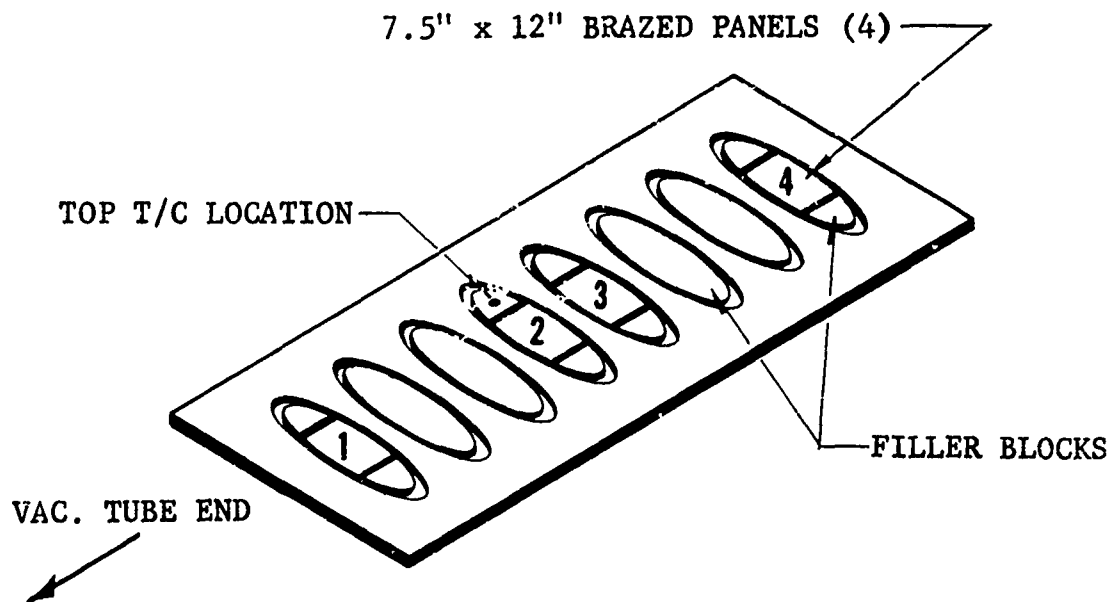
TOOLING AND TEST SPECIMEN COMPONENTS OF
